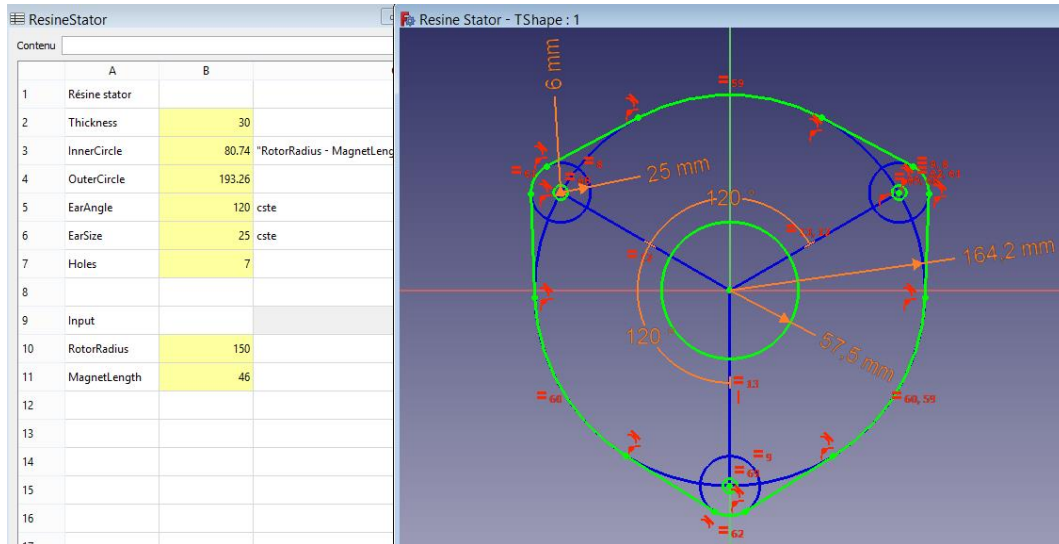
Calculation sheet linked to the drawing; stator resin - T shape
